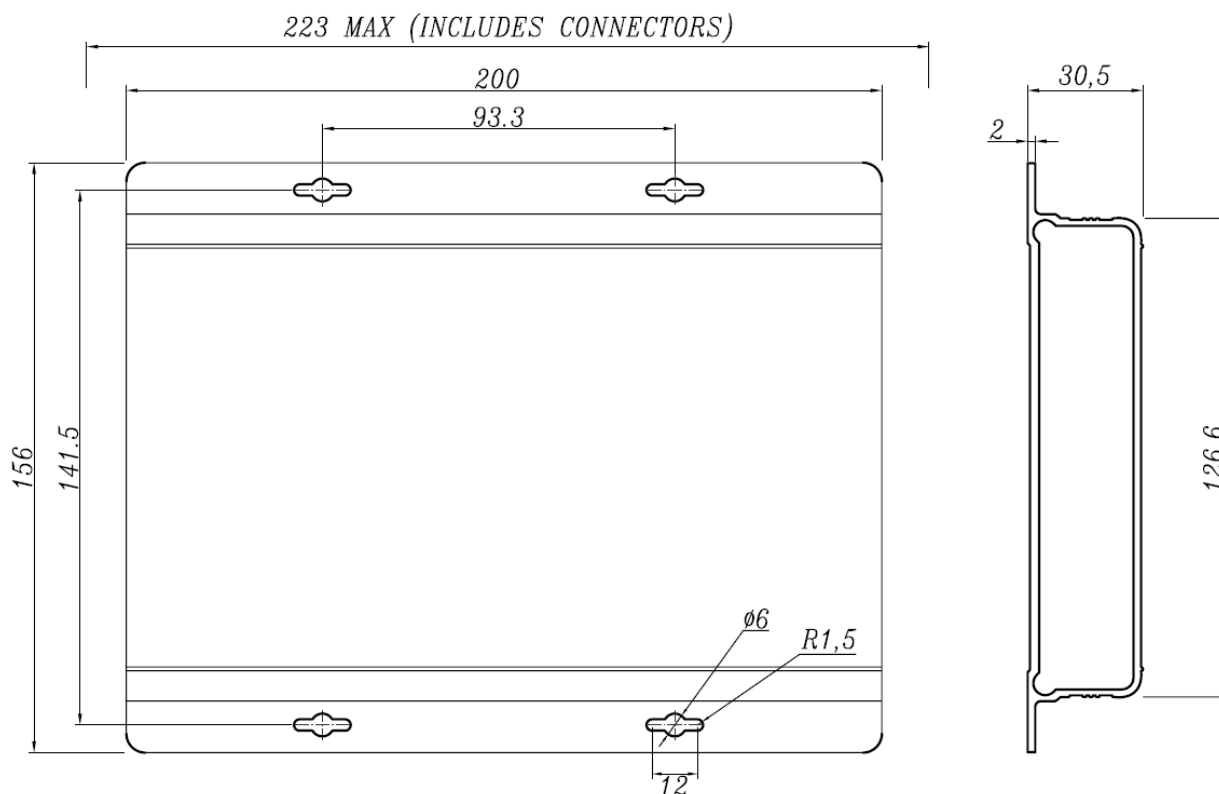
Dimensional drawings of Standalone unit (mm)
